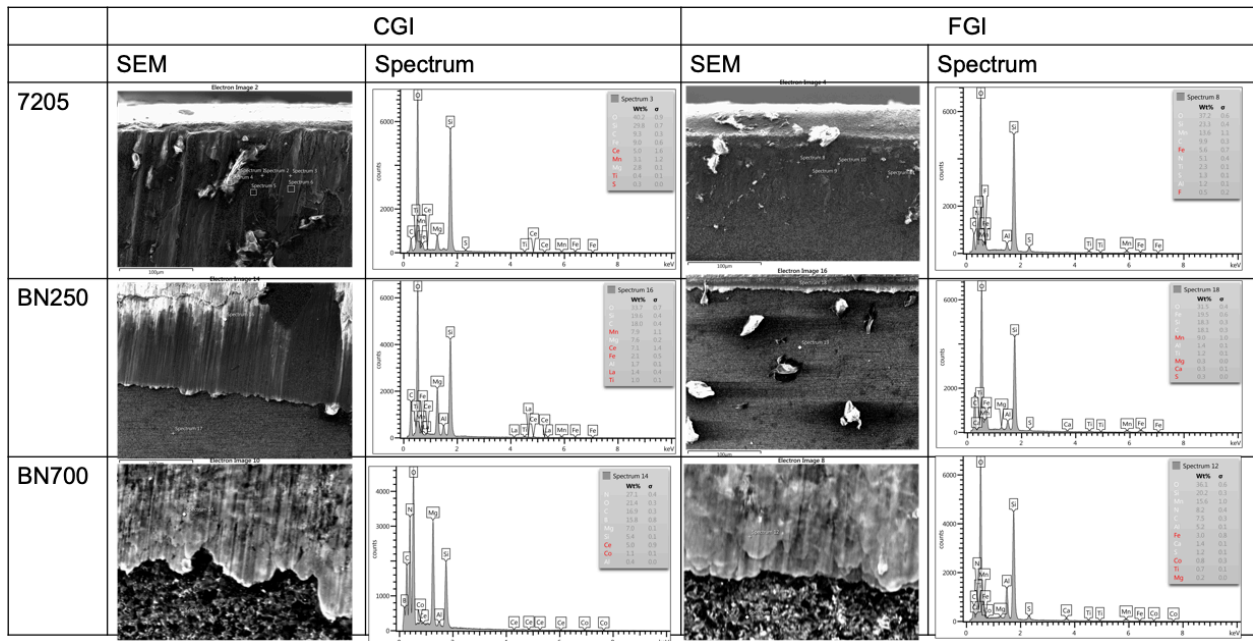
The Flank face of CB7205, BN250 and BN700 after cutting CGI and FGI at 800 m/min.
